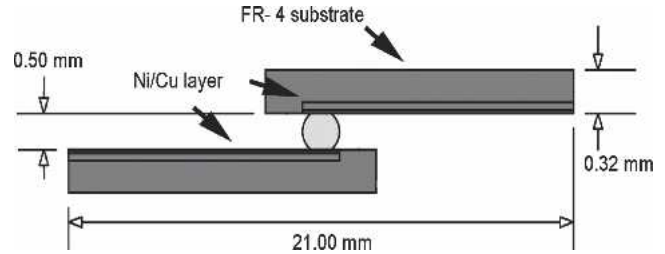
Single SAC387 solder sphere joint specimen with two FR-4 substrates; the metallization is Ni on copper. The diameter of solder ball: 0.5 mm; and pad opening: 0.3 mm.
